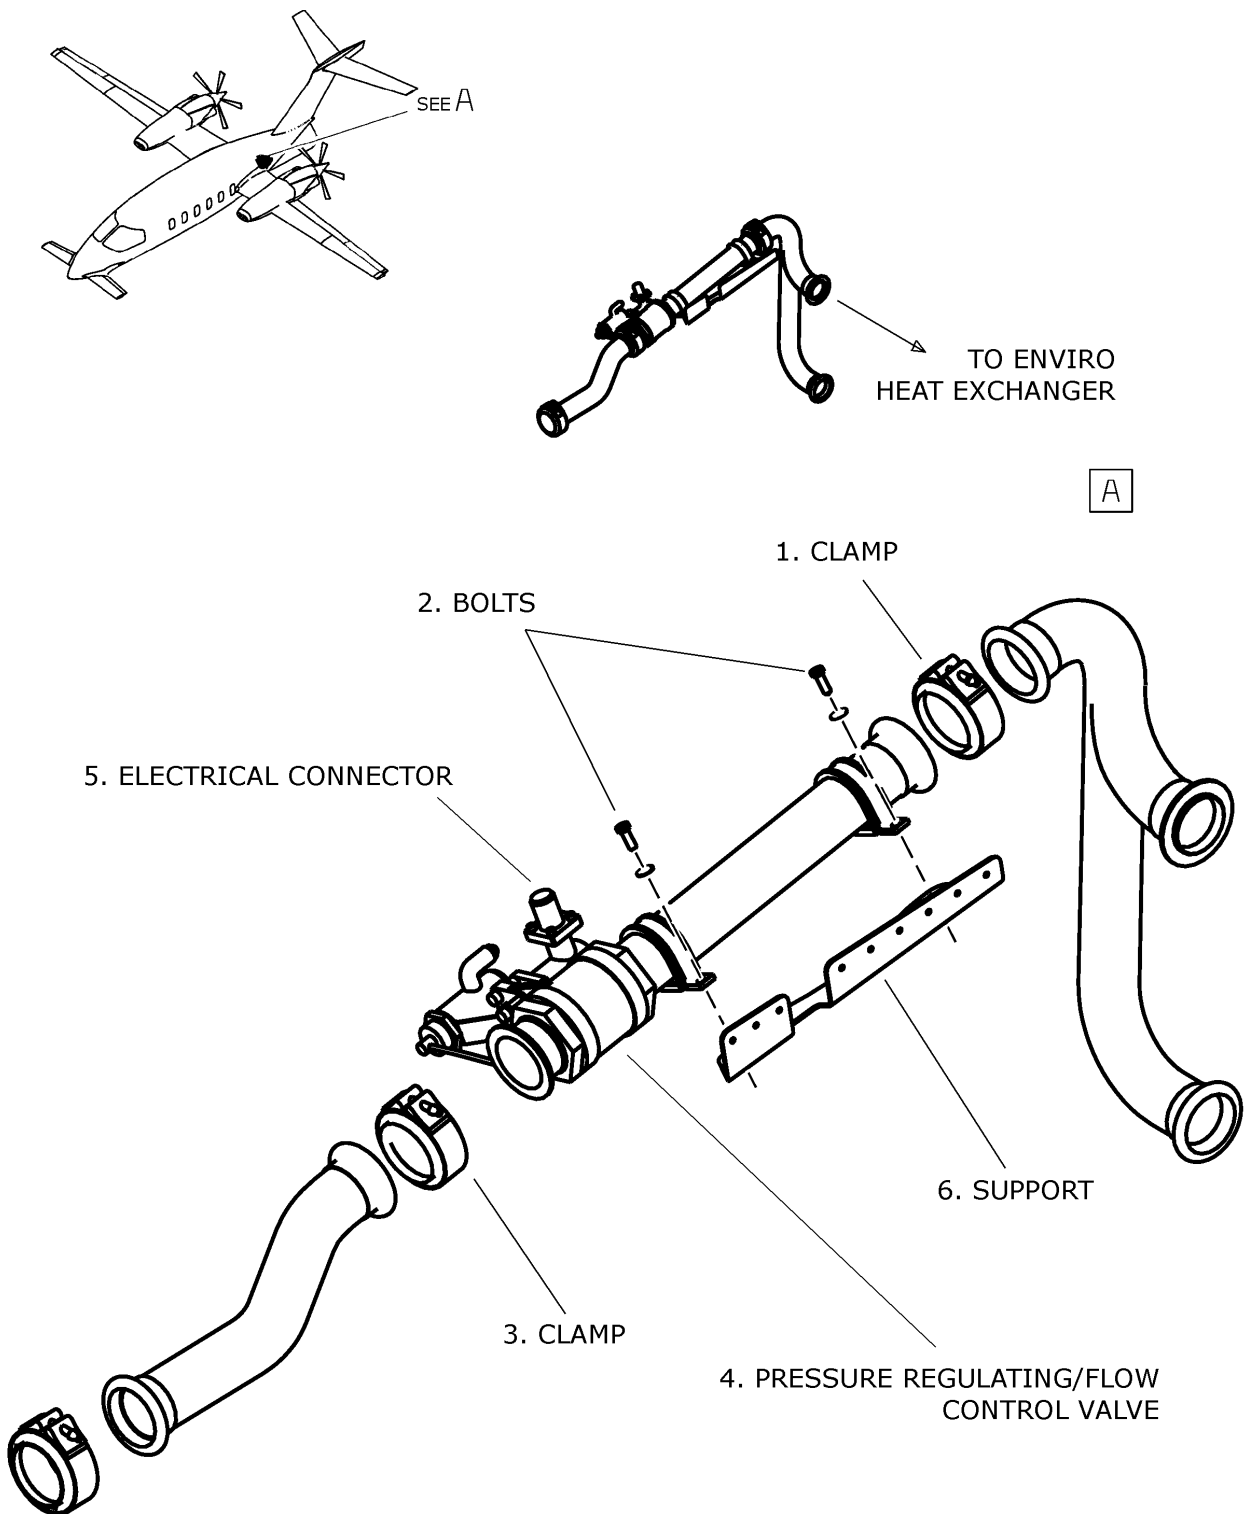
Pressure Regulating/Flow Control Valve (Third Evaporator not installed) -
